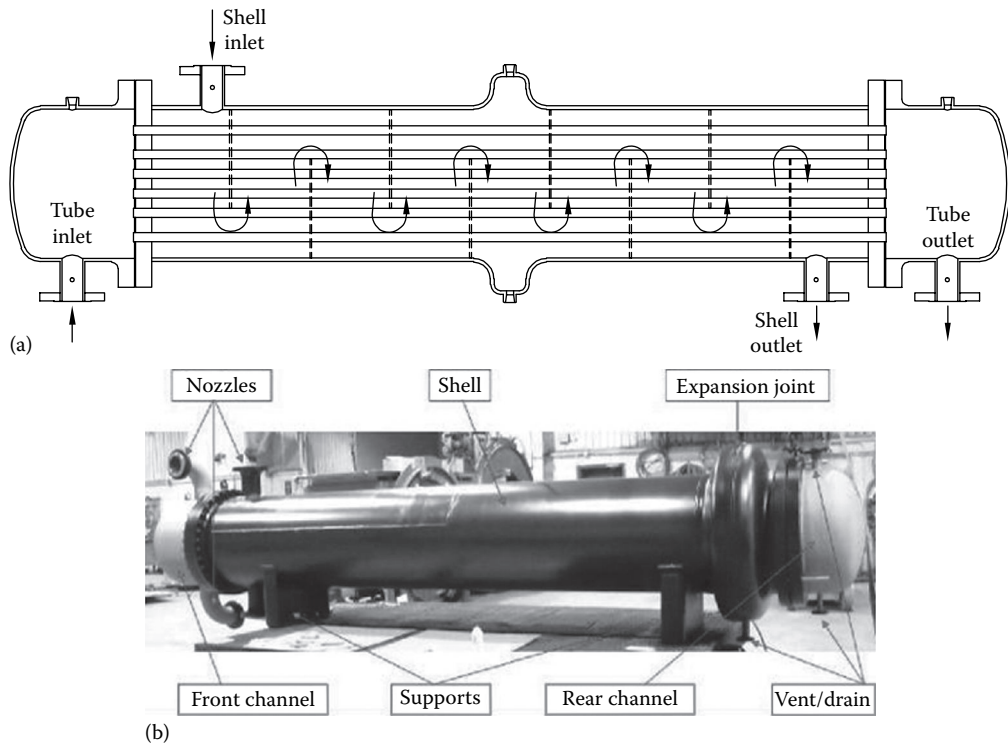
(a) Cross-sectional view of a fixed tubesheet shell and tube heat exchanger with an expansion joint (schematic). (b) Fixed tubesheet shell and tube heat exchanger with an expansion joint. (Courtesy of Festival City Fabricators, div. of CSTI, Stratford, Ontario, Canada.)
